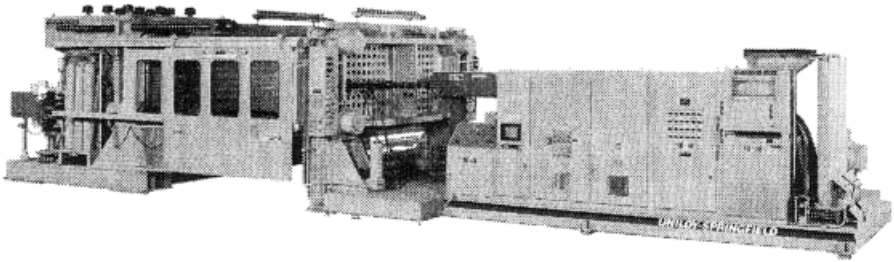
Multi-nozzle Uniloy machine. (Courtesy of Uniloy/Milicron.)
